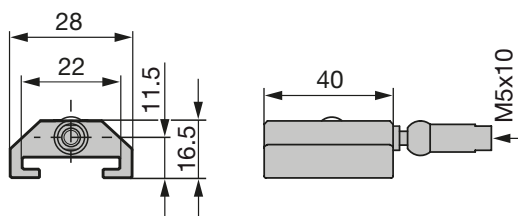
Installation dimensions of BTL5-T-2814-1S magnet
